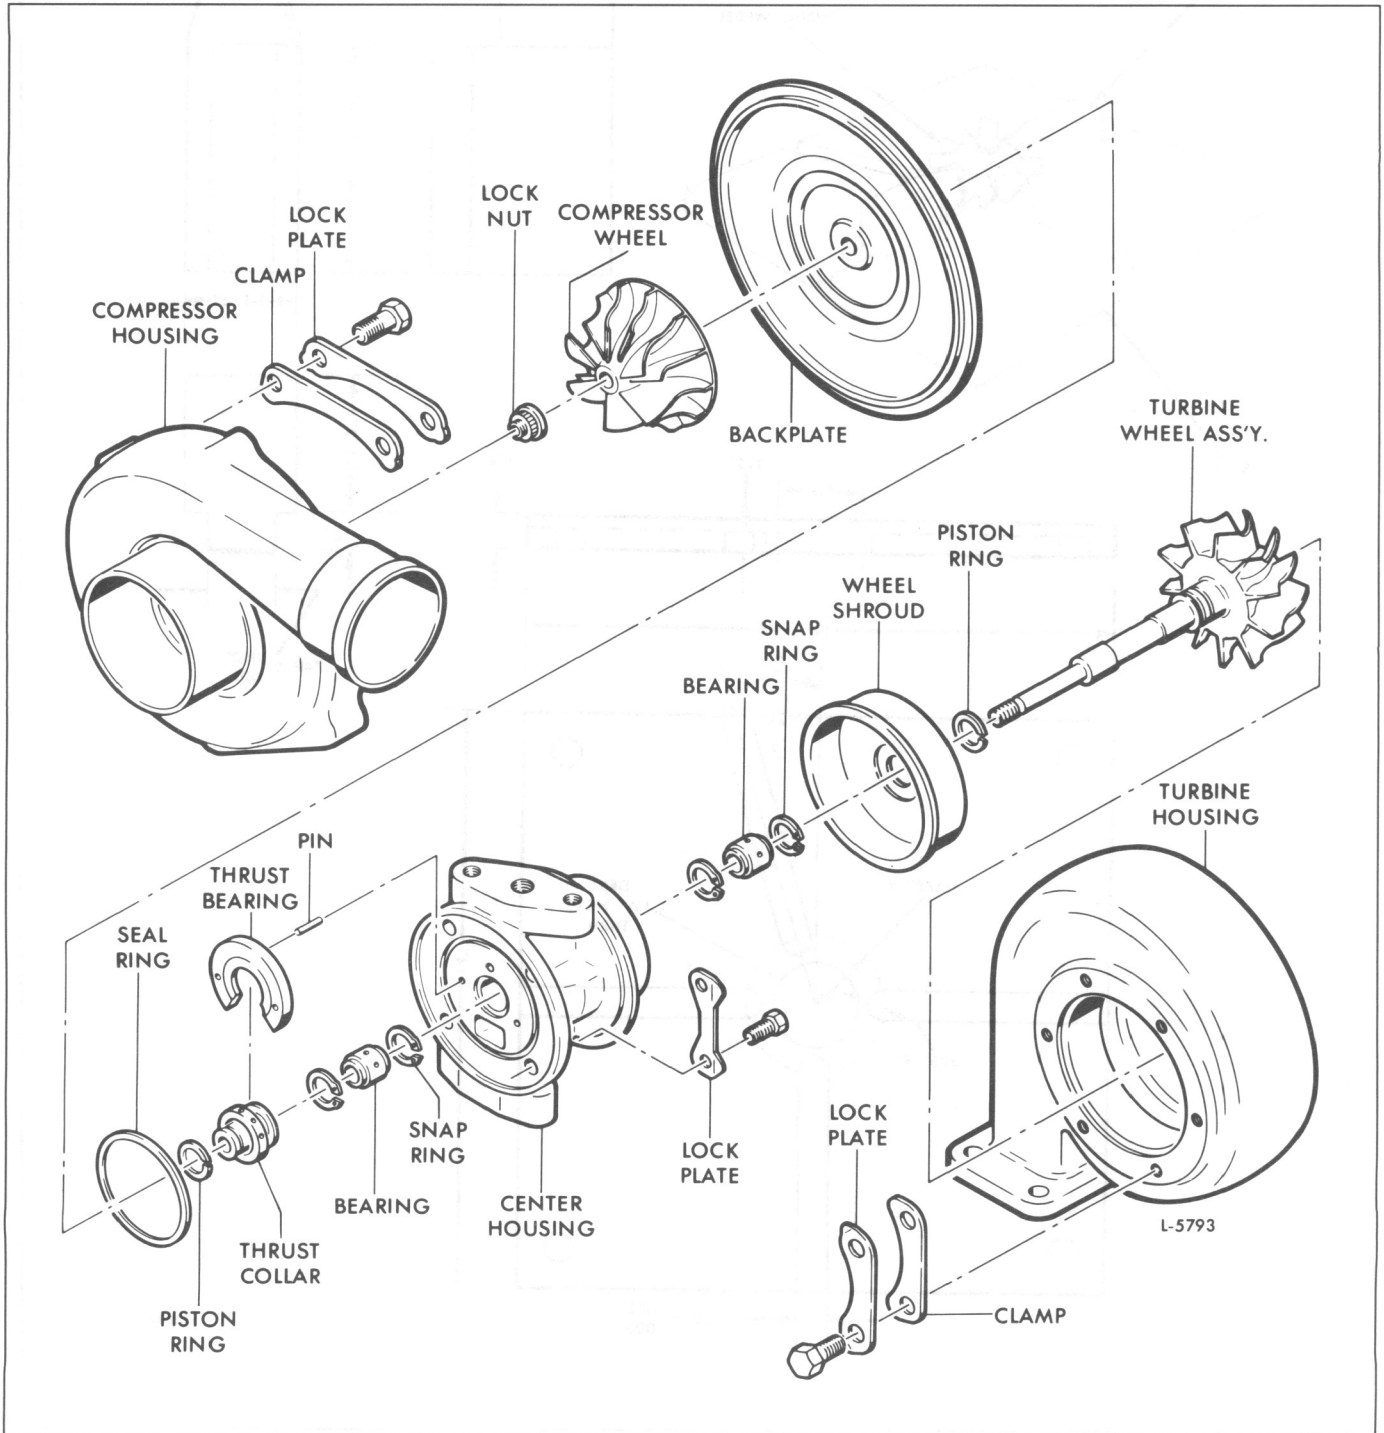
T04B Turbocharger Details and Relative Location of Parts
